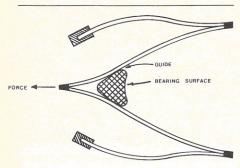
Modification of the Compliant Mechanical Gripper with a guide block. The guide block constrains the inner struts of the gripper and provides a bearing surface for contact with objects.
